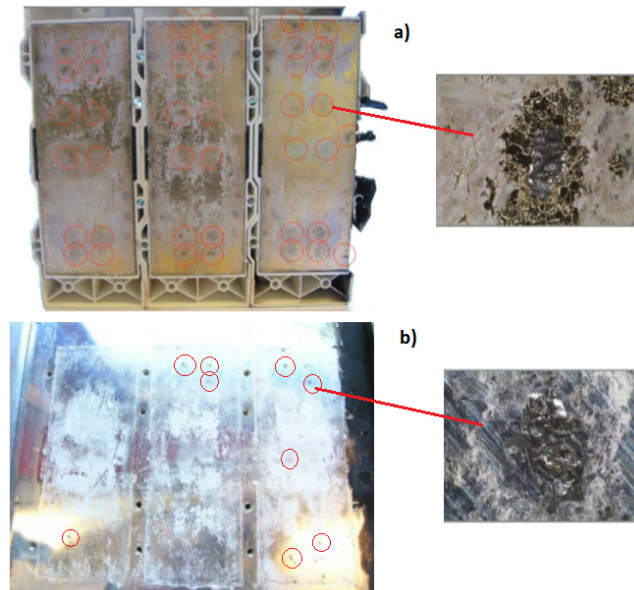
IGBT Package-Related Degradation Issues [50]: a) Fretting Corrosion of DBC Bottom Layer, b) Degradation of Thermal Paste and DBC Bottom Layer.
